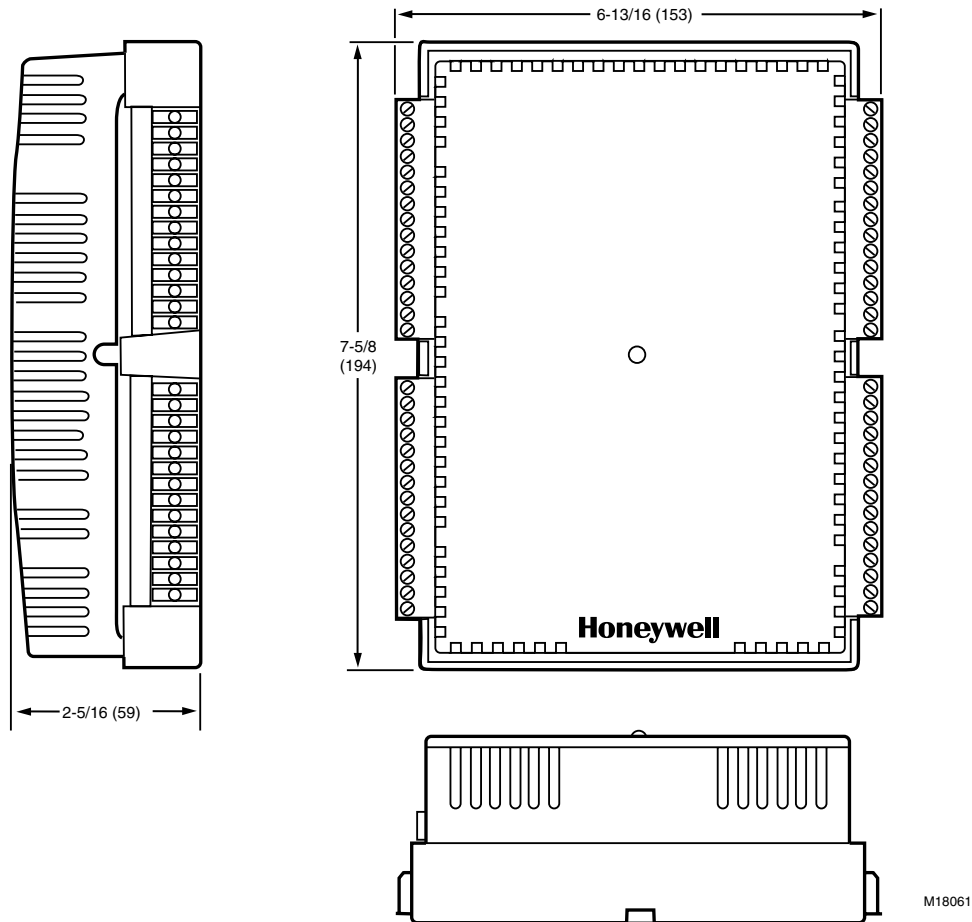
W7760C assembly mounting dimensions in in. (mm).
